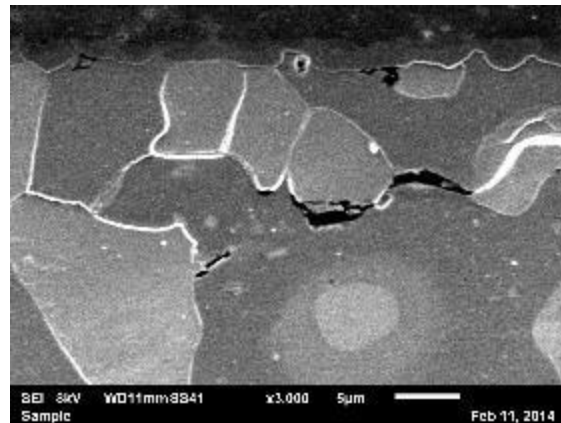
Cracking in QFN88 solder joint assembled using SnBiAg solder paste.
